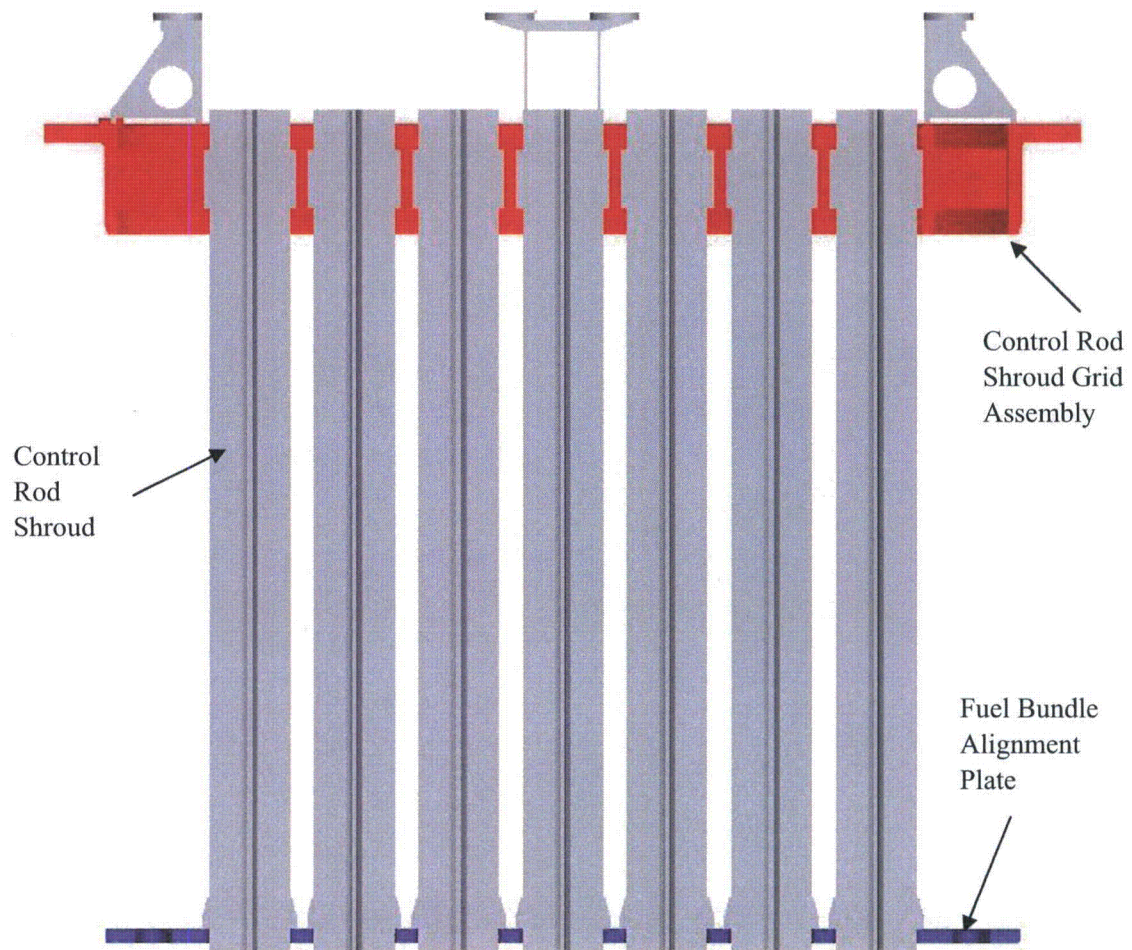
Illustration of Palisades Control Rod Shroud Assembly
